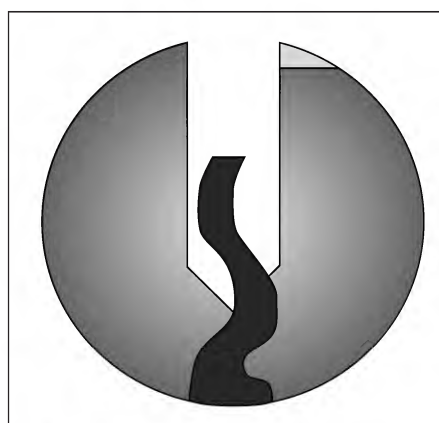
, shows how this second shear line is achieved for this CCW cylinder. A part of the cylinder plug on one side of a single pin chamber is removed. The important part of making one of these cylinders is the amount of
